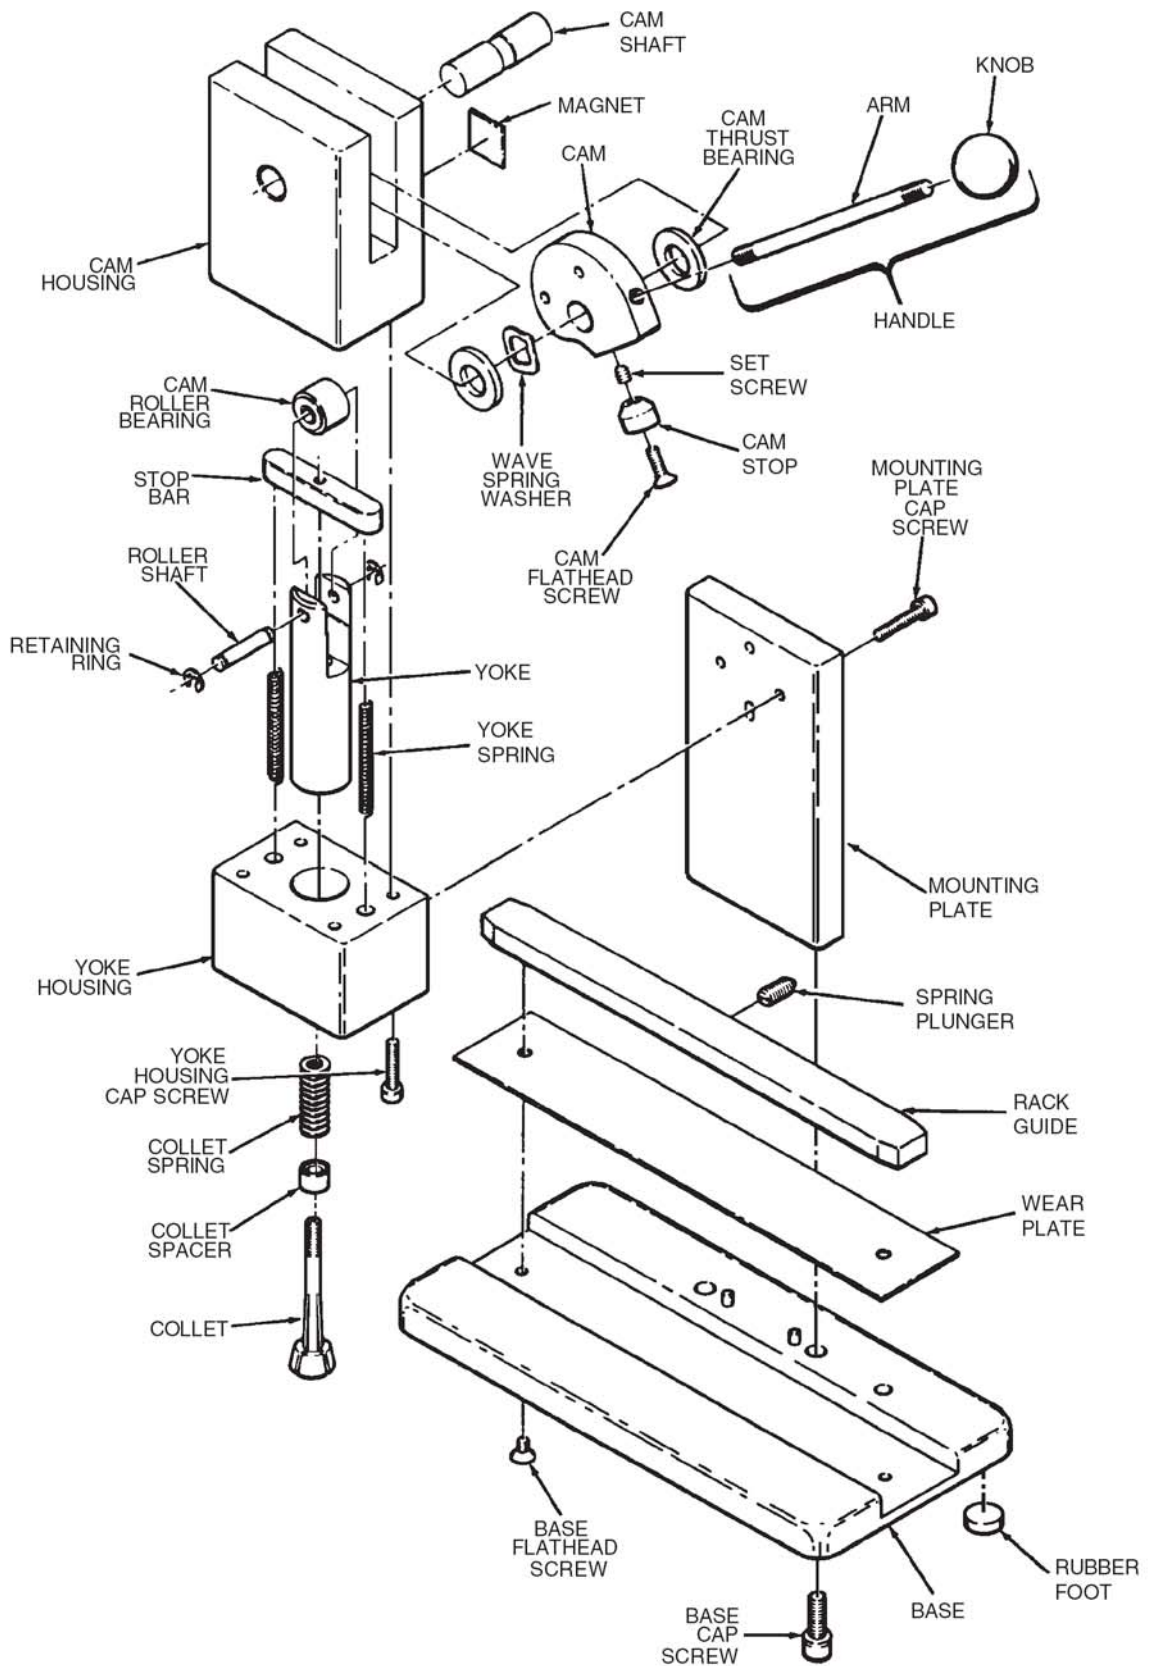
Exploded View of ULTRACRIMP® Sealing Tool
